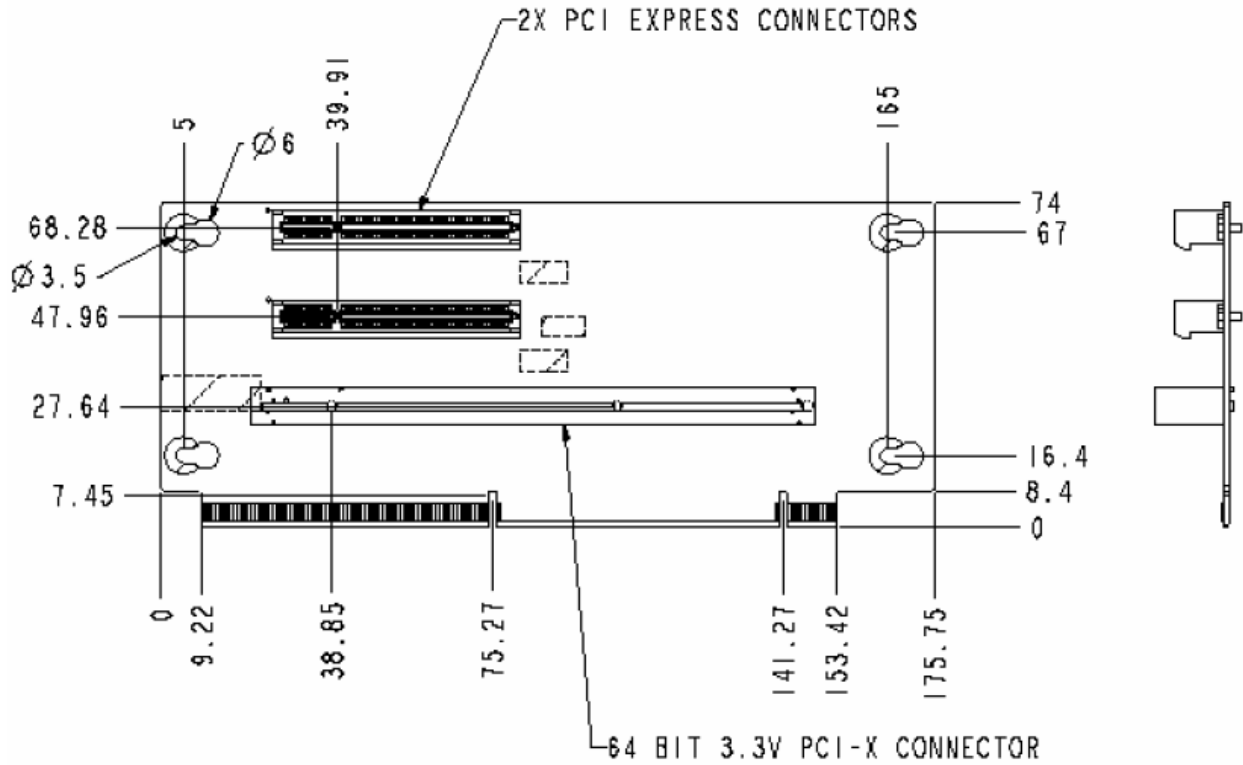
Full Height/Full-Length PCI-E Riser Board Layout
